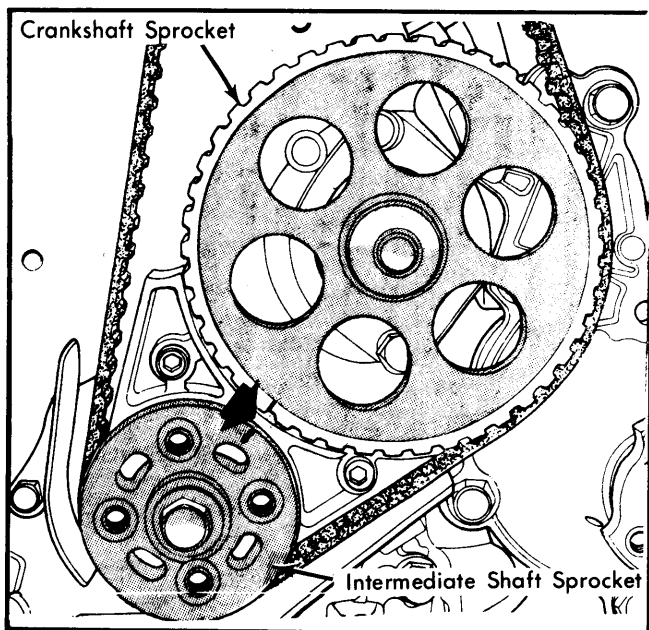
Crankshaft and Intermediate Sprocket Alignment Marks.
